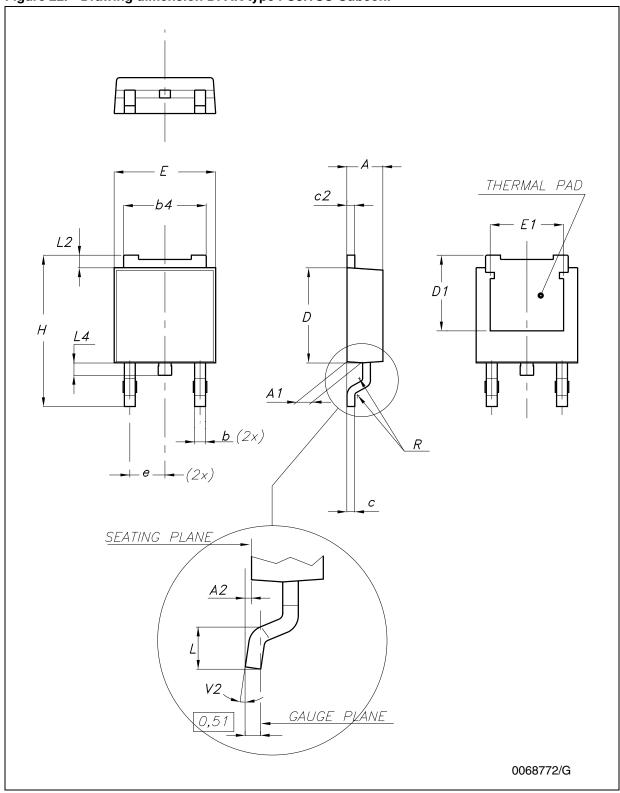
Drawing dimension DPAK type FUJITSU-Subcon.
